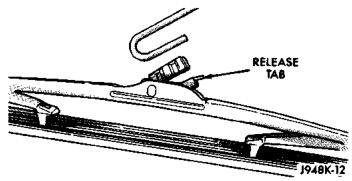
Front or Rear Wiper Blade Remove/Install - Typical
